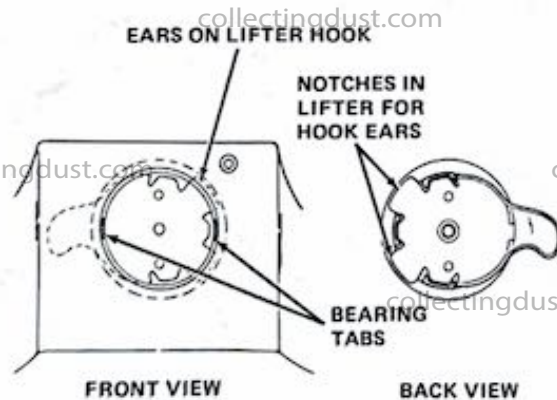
Positioning of the belt lifter, hook, and bearing
